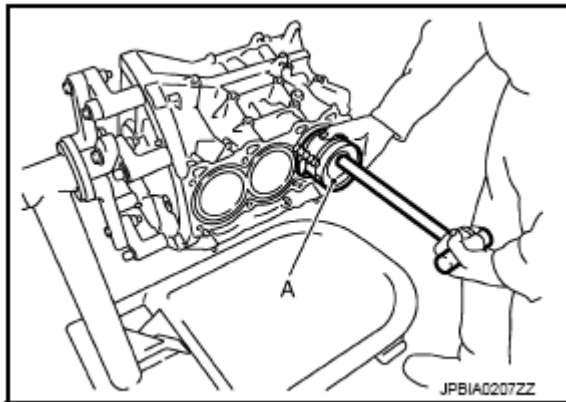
Installing Piston And Connecting Rod Assembly To Crankshaft
